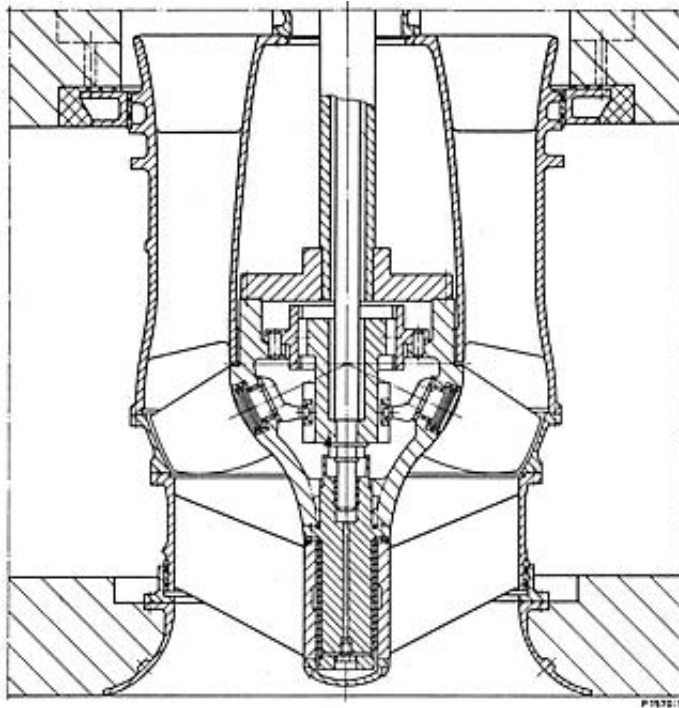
Mechanical adjustment gear for pitch angle adjustment of impeller blades on a semi-axial propeller pump
